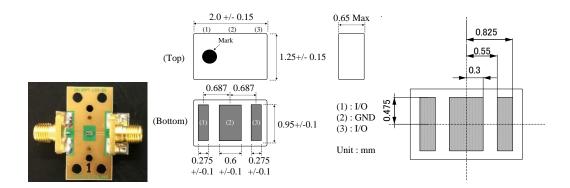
Multilayer Ceramic Filter with its evaluation board (example photo), Dimension and footprint
